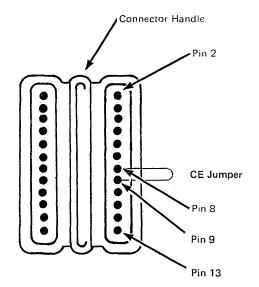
3278 Top-Card Connector CE Jumper (Two Base Cards)
